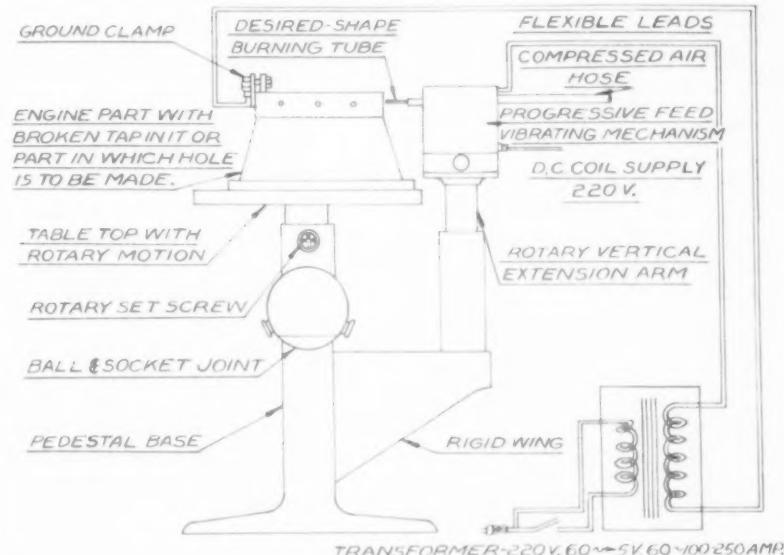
, universal burning fixture for making hole of any cross-section shape in hardened material and burning out broken tools. Used on threaded tools.
